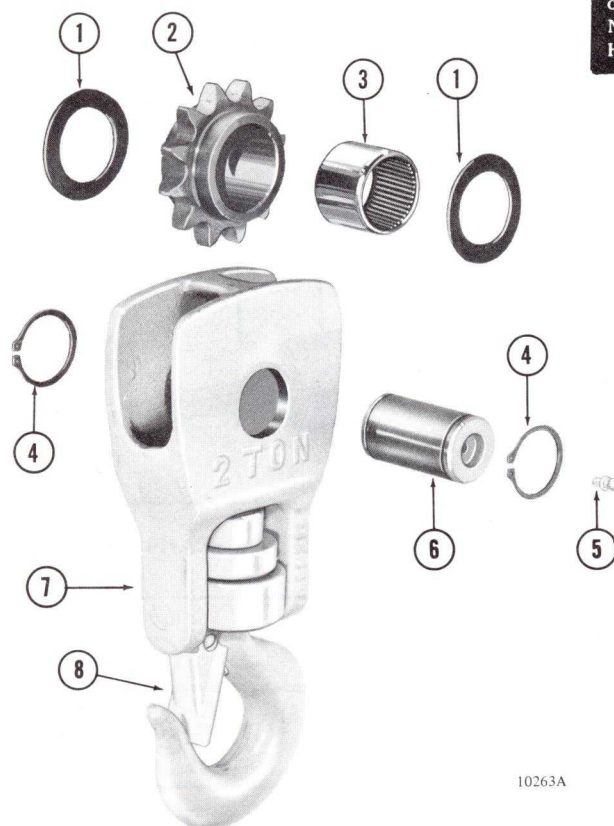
2 & 3 TON LOWER BLOCK ASSEMBLIES (Coil Chain Model Hoists)
